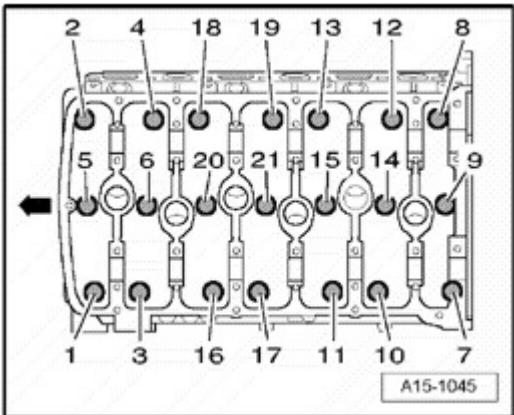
Cylinder Head Bolts Loosing Sequence - Cylinder Bank 2 (Left)
